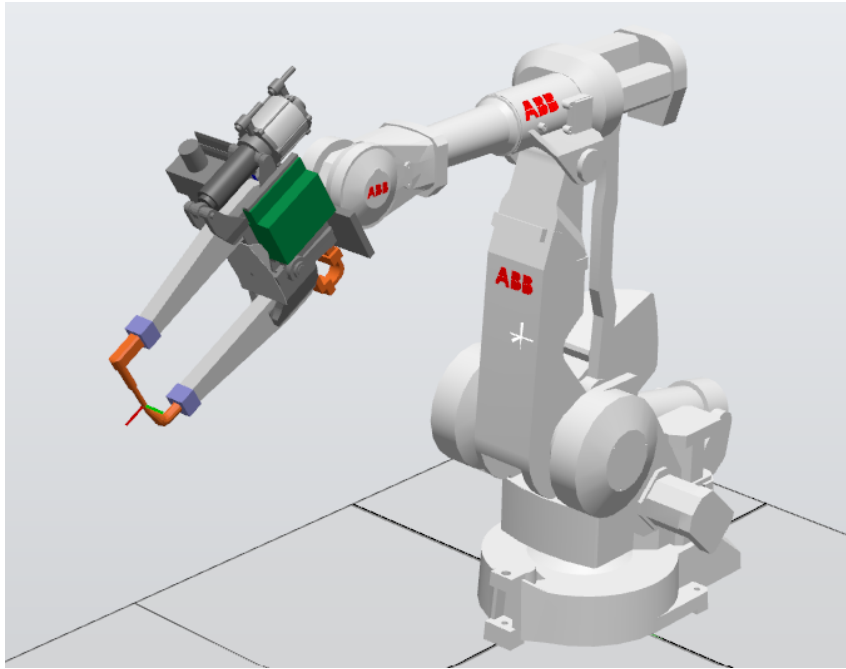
Robot equipped with welding tool. The electrode is the orange colored part of the tool.
